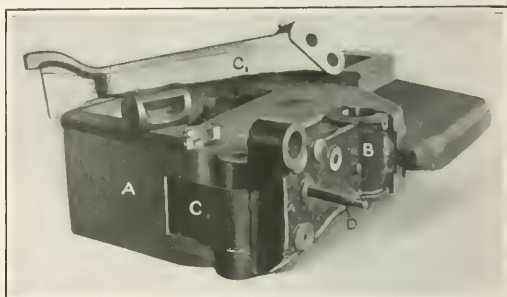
Parts of Fellows Gear Shaper Cabinet assembled ready for Drilling Operations
